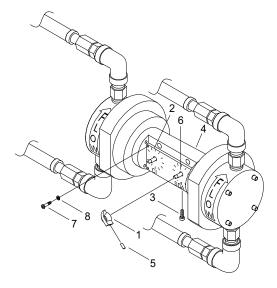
Fuel Additive Injector Pump Power Frame Cover.
